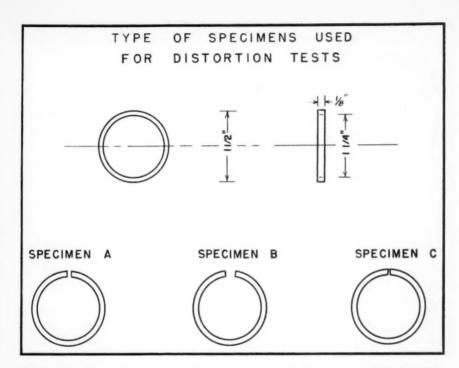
Effects of machining stresses can be proved by simple test pieces as shown herewith.
